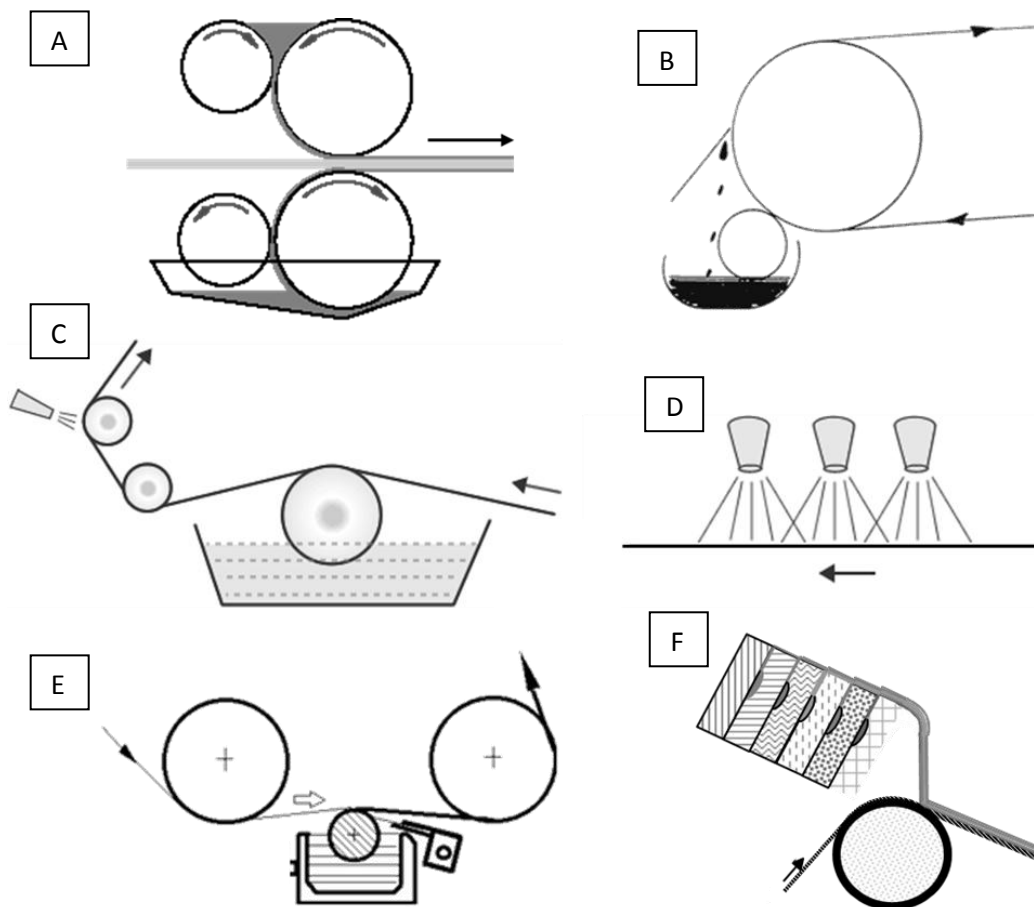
Schematic principle of coating methods. A: Roll coating (double sided). B: Blade coating. C: Air knife coating. D: Spray coating. E: Reverse gravure coating. F: Curtain coating with slide die.
